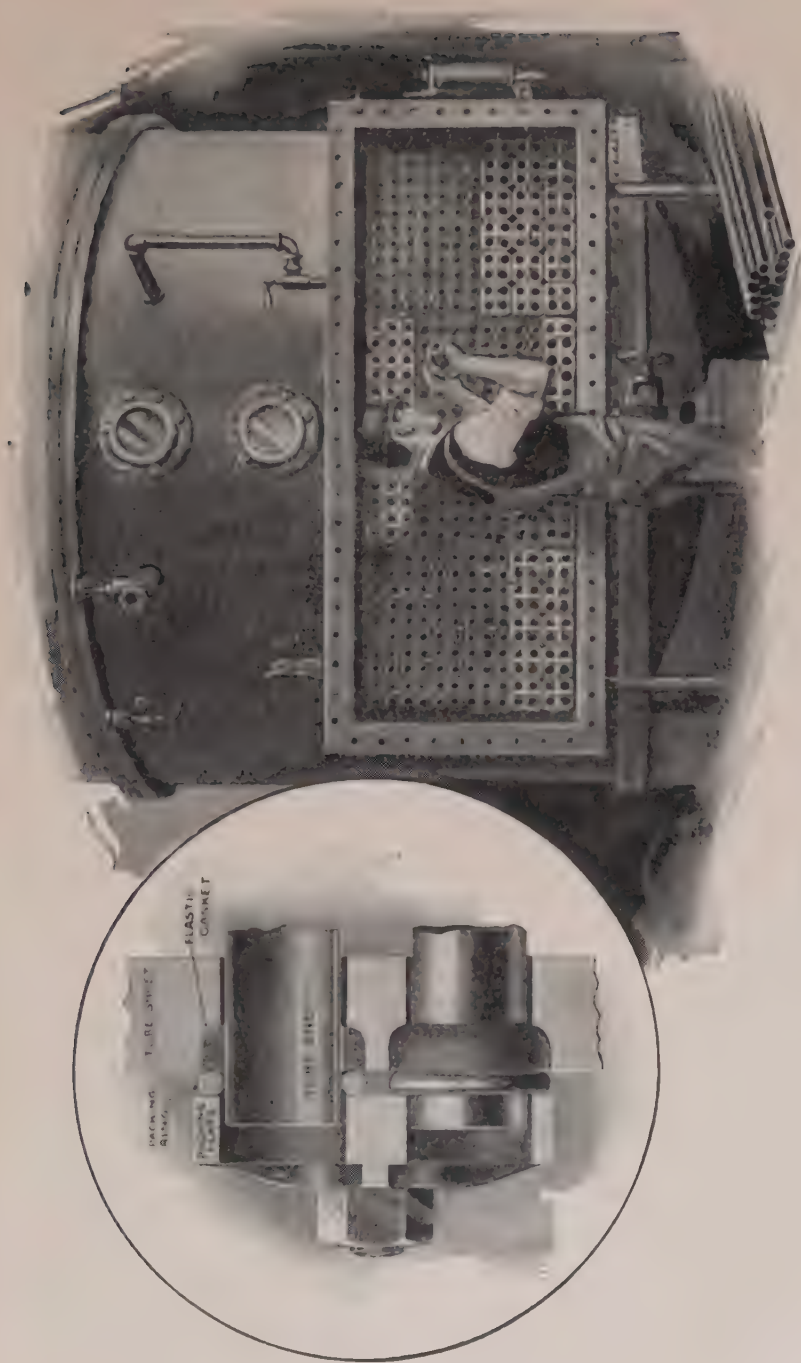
Method of Fastening Tubes in Zarembo Evaporators.
